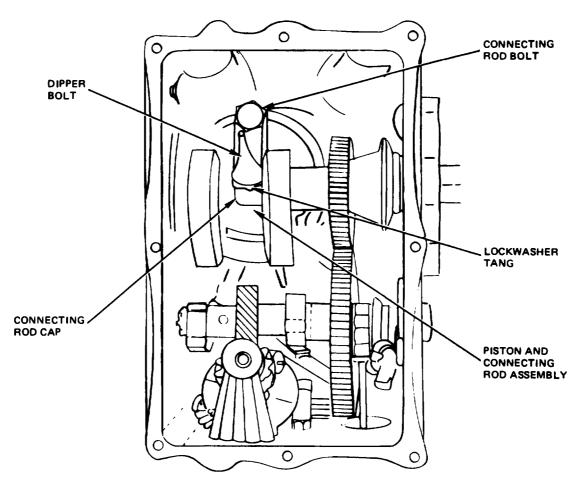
Piston and Connecting Rod Assembly, Removal and Installation
